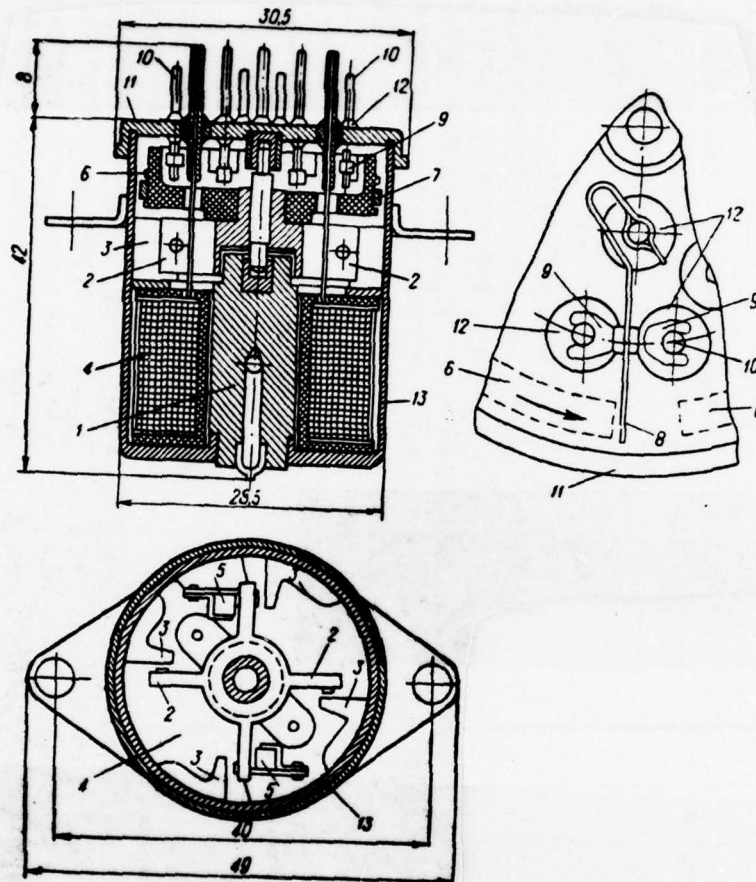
Relays of the type RES8. 1 - core; 2 - armature; 3 - pole; 4 - coil; 5 - permanent magnet; 6 - driving/moving small cup from polyfluoroethylene resin; 7 - damping ring; 8 - movable contact spring; 9 - fixed contact; 10 - leading-out pin; 11 - socket of Kovar alloy;
